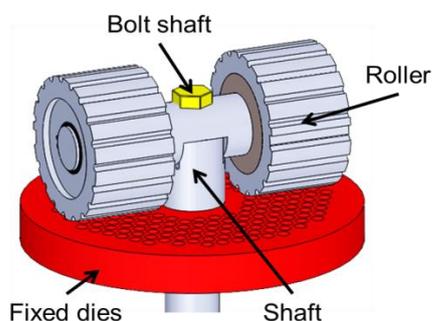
Position of fixed dies, shaft, bolt shaft and roller
